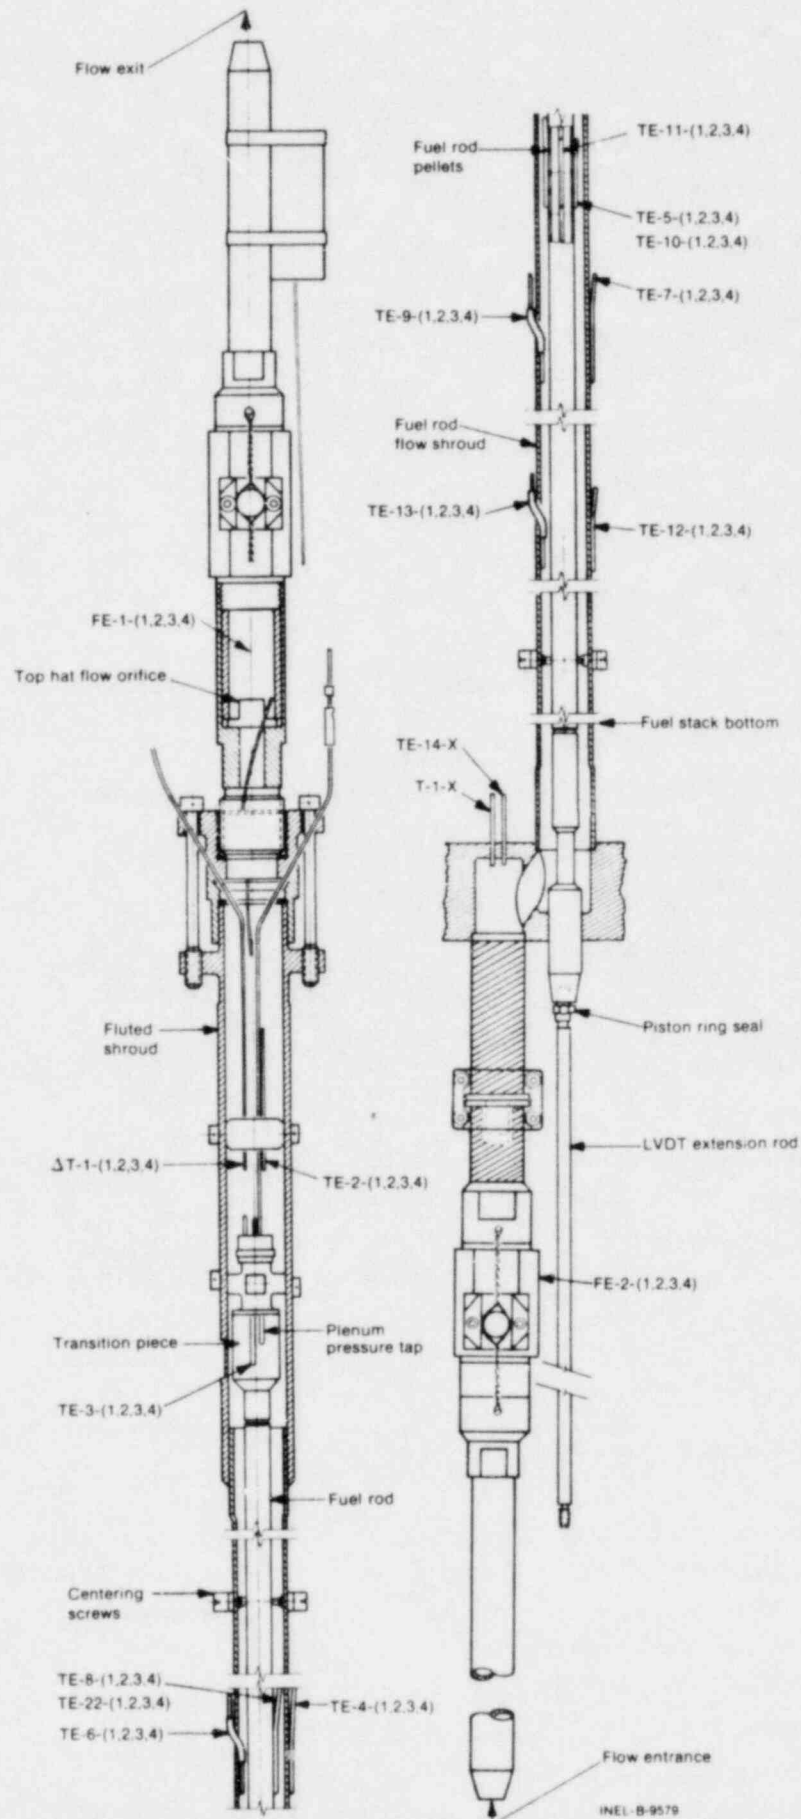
LOC-11 fuel rod assembly with instrumentation.
